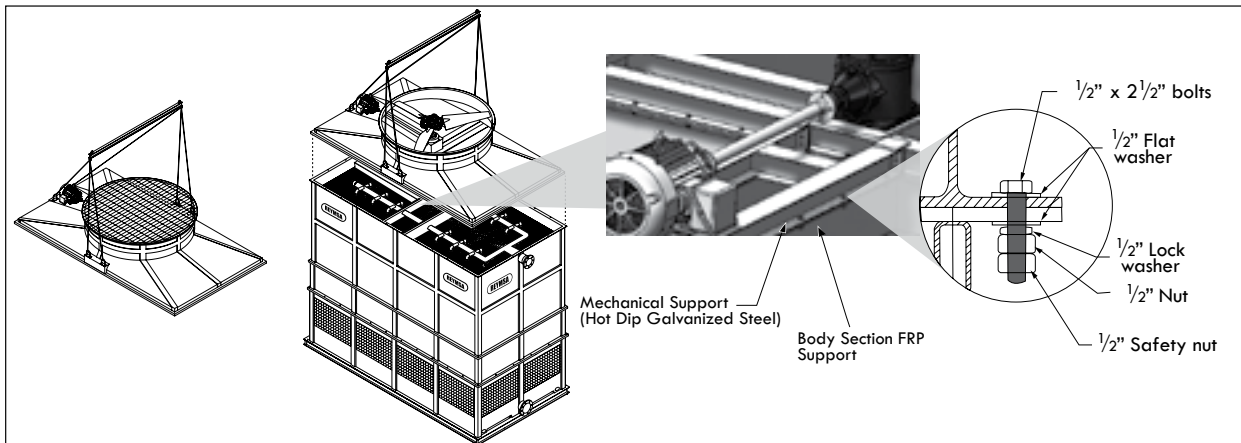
Fan Deck installation of an RTG and RTGTC Tower with motor installed outside the airstream.
